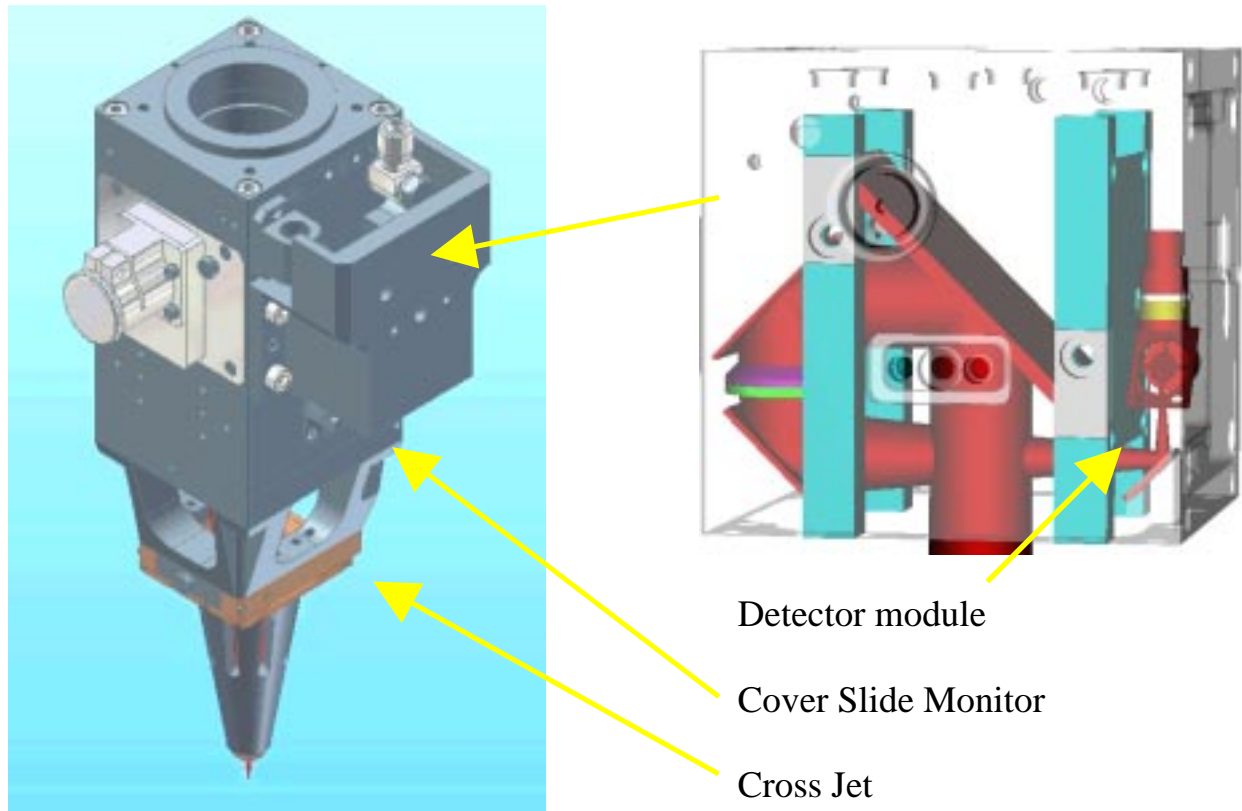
Selective temperature and standard backreflexion detector mounted to an observation unit fitting to welding heads which are not prepared for monitoring purposes.
